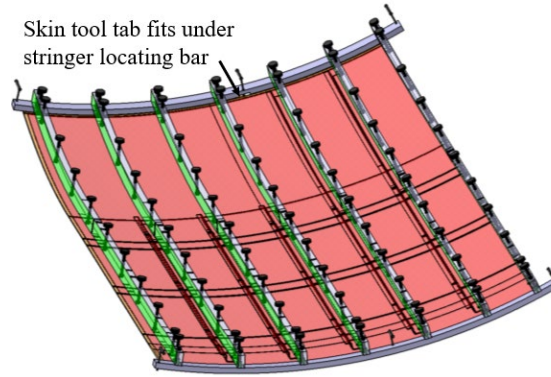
Stringer locating bars that pin onto Co-Fusion tool
